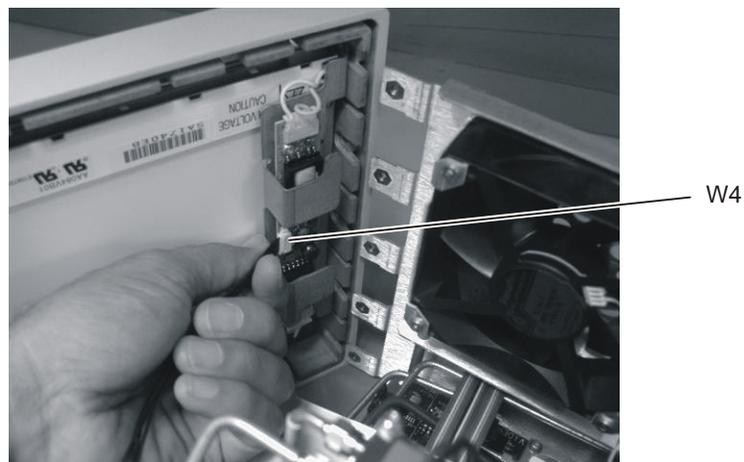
Disconnecting the W4 Cable from the A3 Backlight Inverter Board
